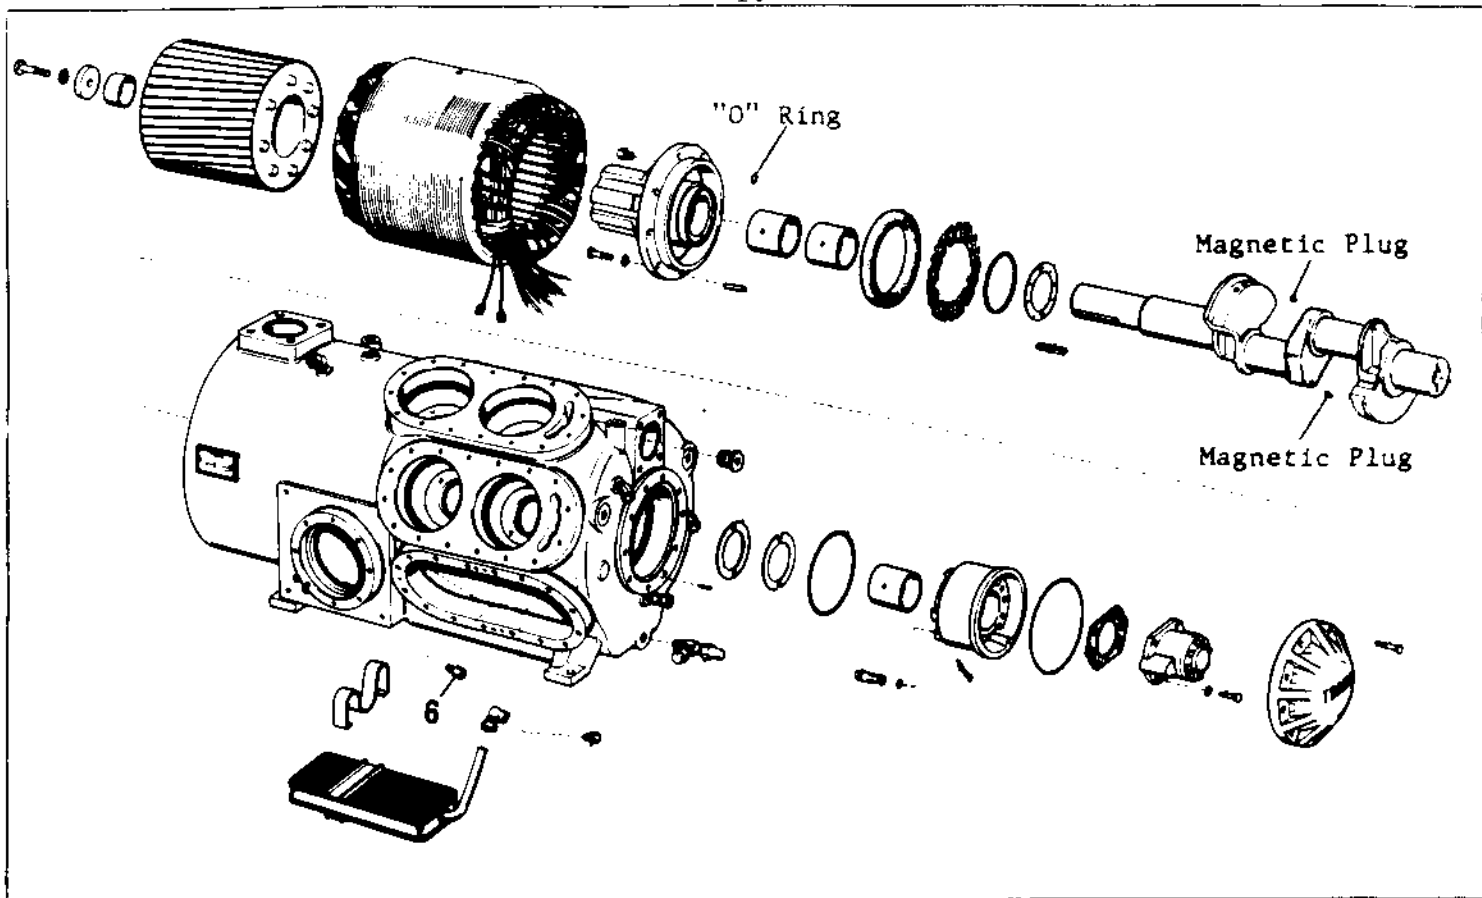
Motor Bearing End, "O" Ring and Crankshaft Magnetic Plugs
